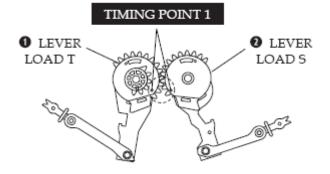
Gear Loading Drive, Slider Cam, Ass'y Lever T, S Load Removal
